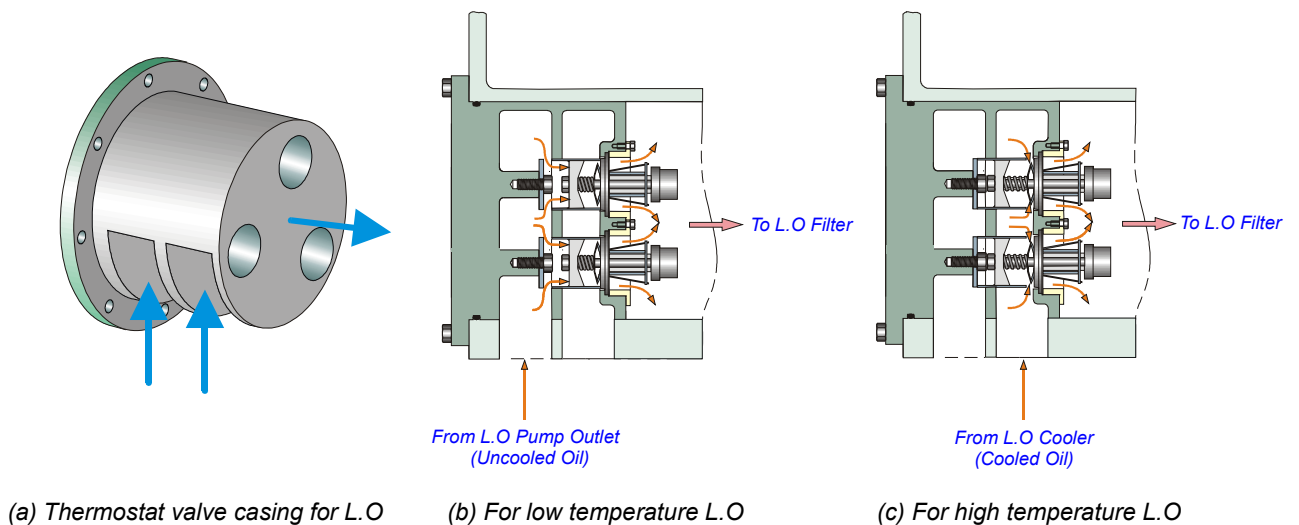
The lubricating oil flow in thermostatic valve (온도 조정 밸브내의 윤활유 흐름)
